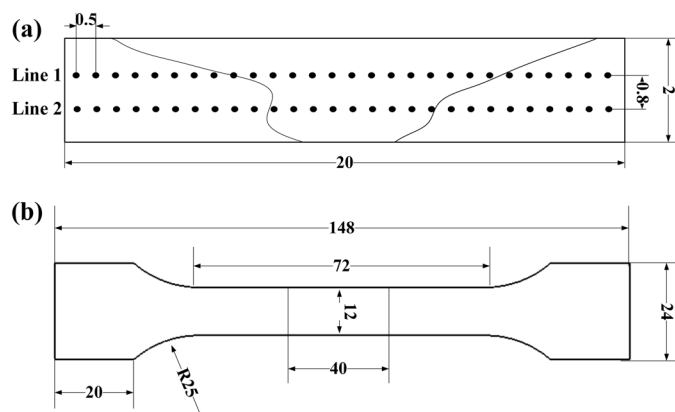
Dimension drawings: (a) microhardness specimen and (b) tensile specimen (unit: mm)
